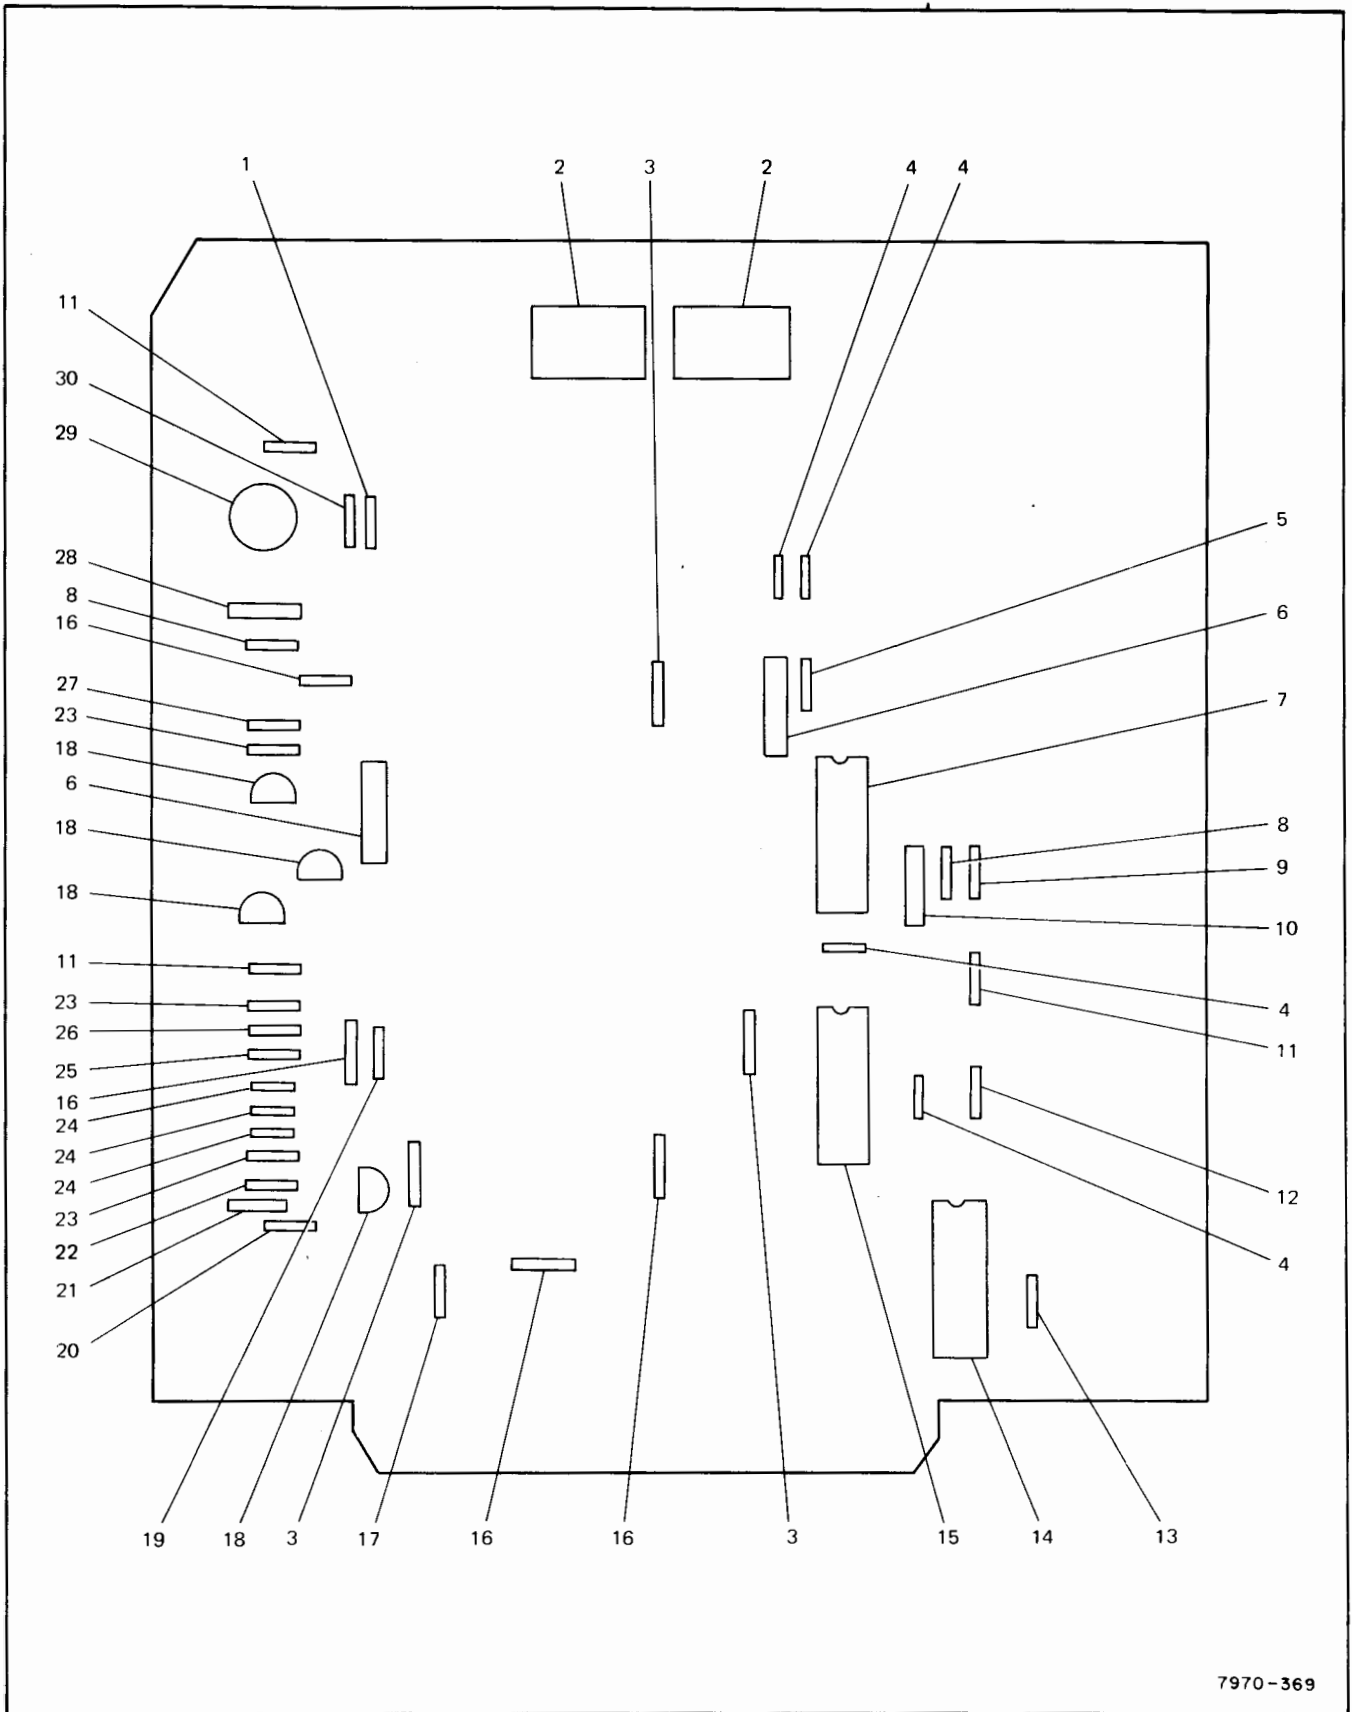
Read Control PC Assembly (Sheet 2 of 2)
